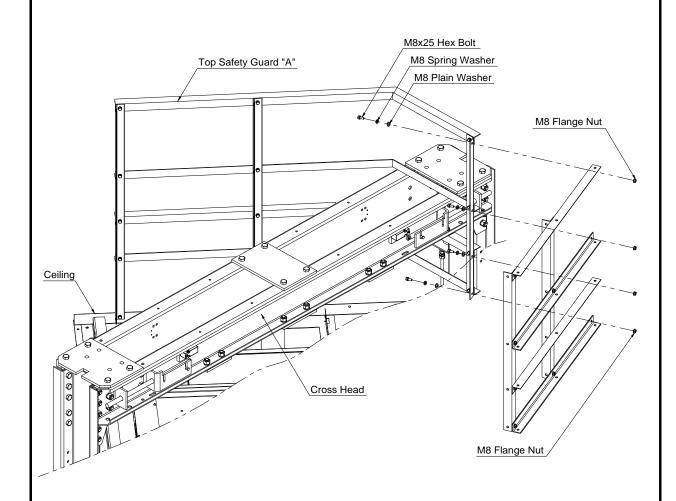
B. CAR TOP SAFETY GUARD (RIGHT SIDE) INSTALLATION (Underslung Fork type)
